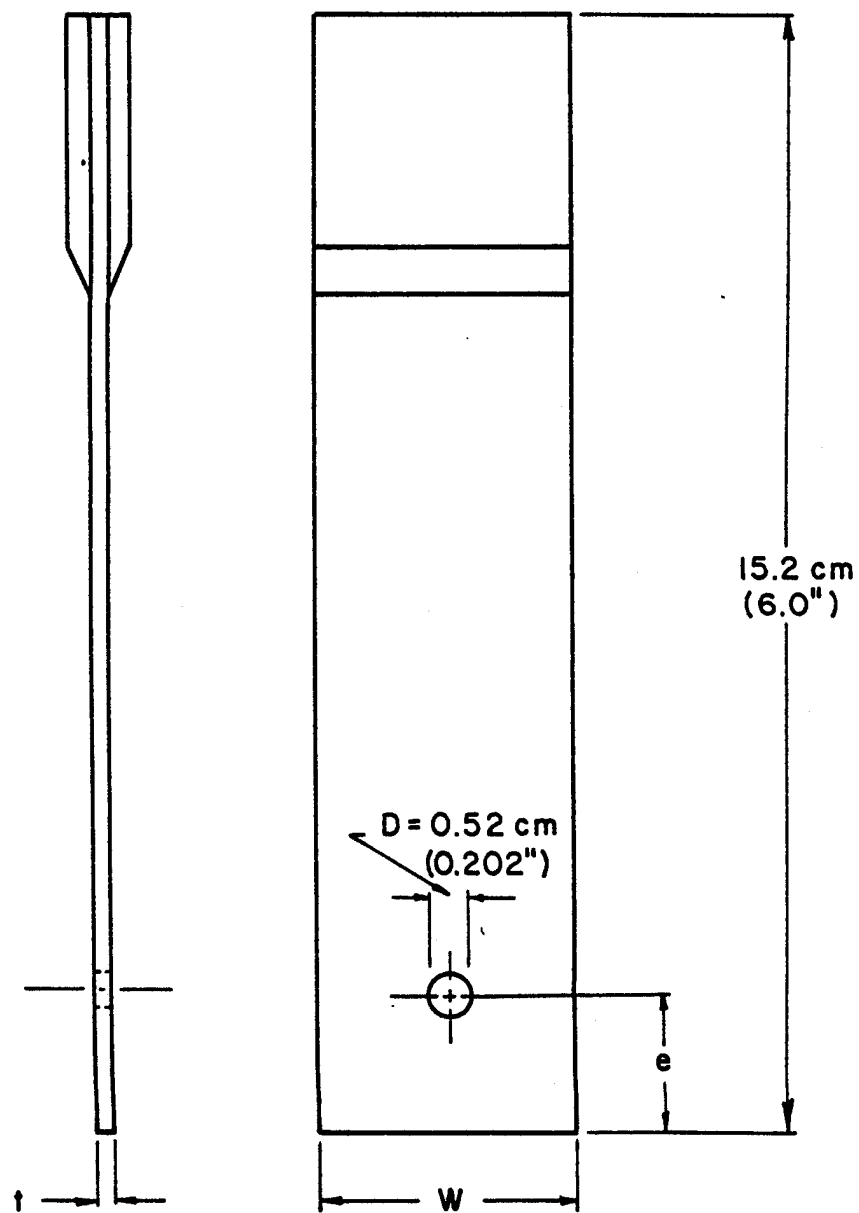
BOLTED JOINT TEST COUPON GEOMETRY
